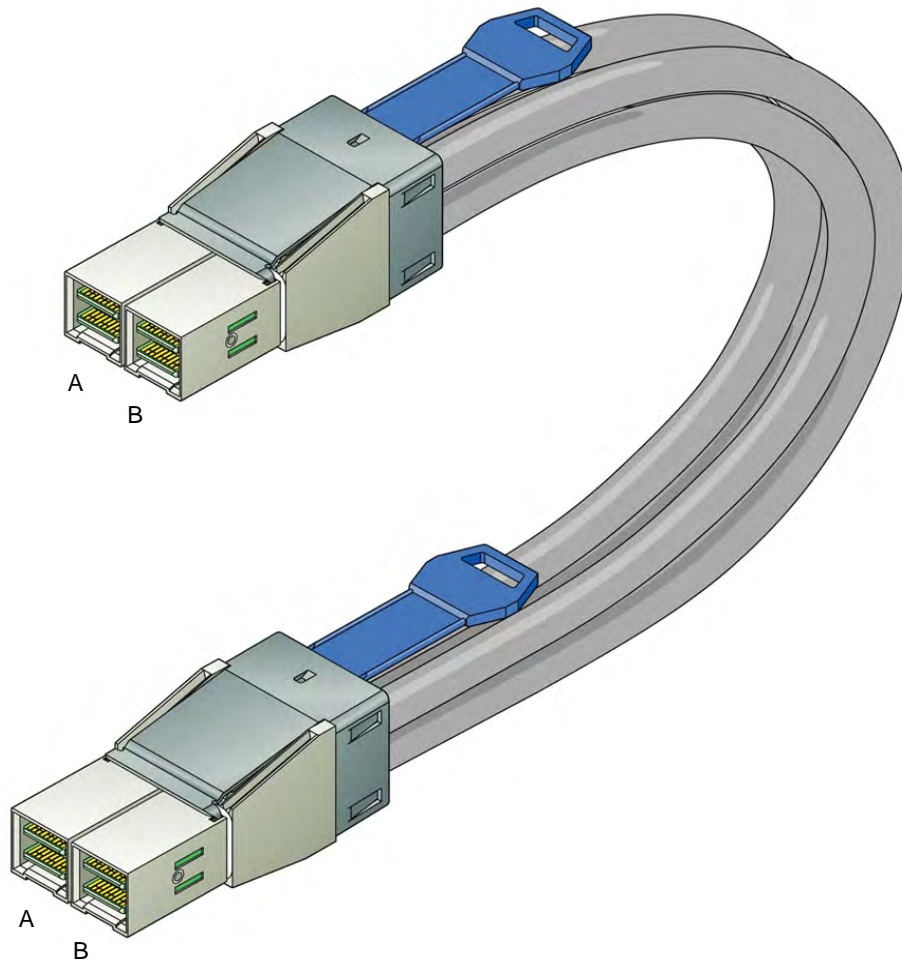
SAS external cable assembly with Mini SAS HD 8x cable plug connectors
